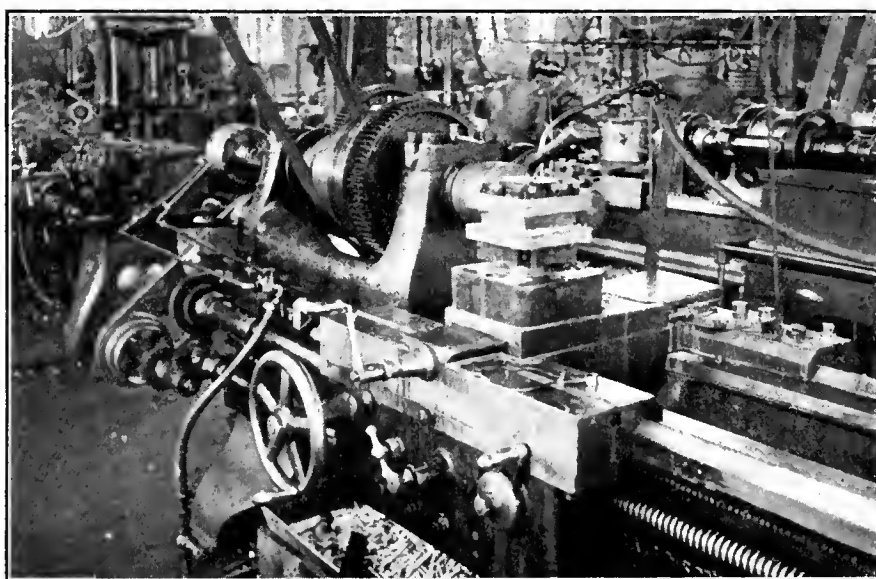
ROUGH TURNING SHELLS ON A "BERTRAM" ENGINE LATHE EQUIPPED WITH AN AIR CHUCK.
